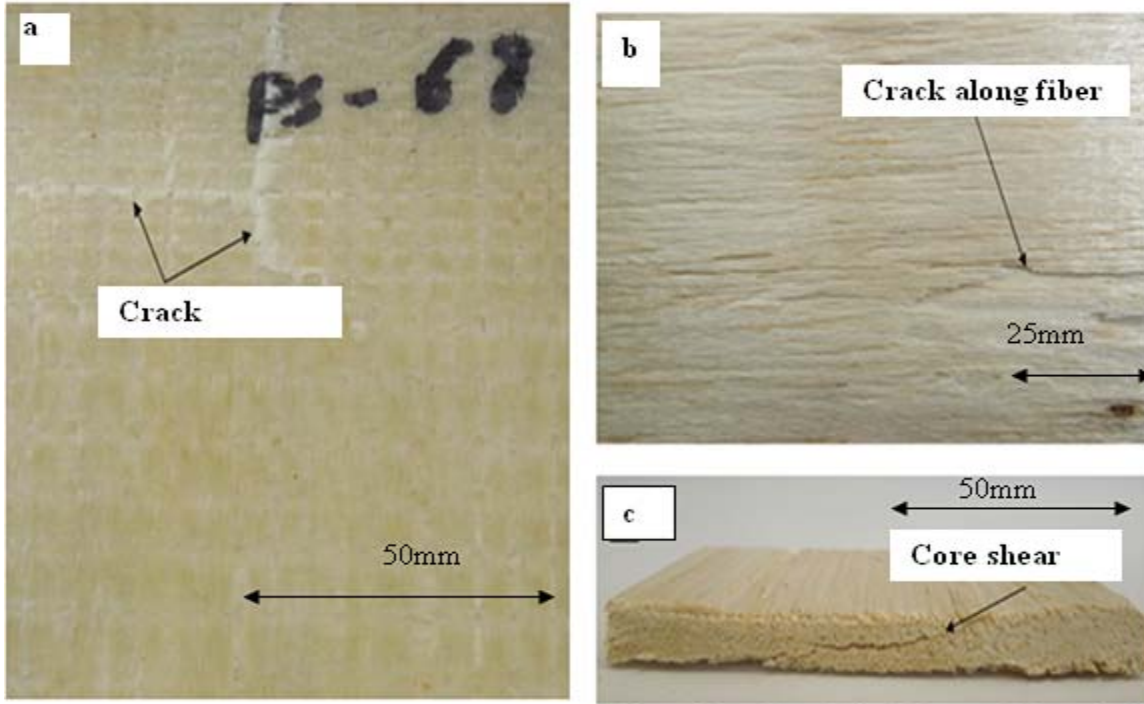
8: Extent of damage in impact side of regular balsa core sandwich composite after impact by 26J (a) skin failure, (b) core cracks along fiber, (c) core shear failure.
